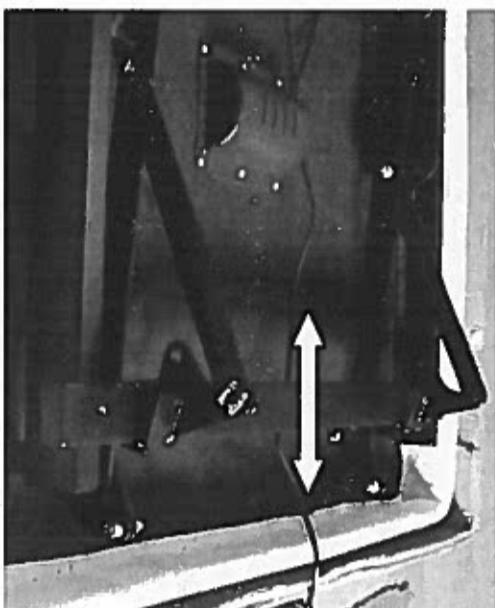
swing back levers and position U-shaped brackets on the rectangular cross bar.
